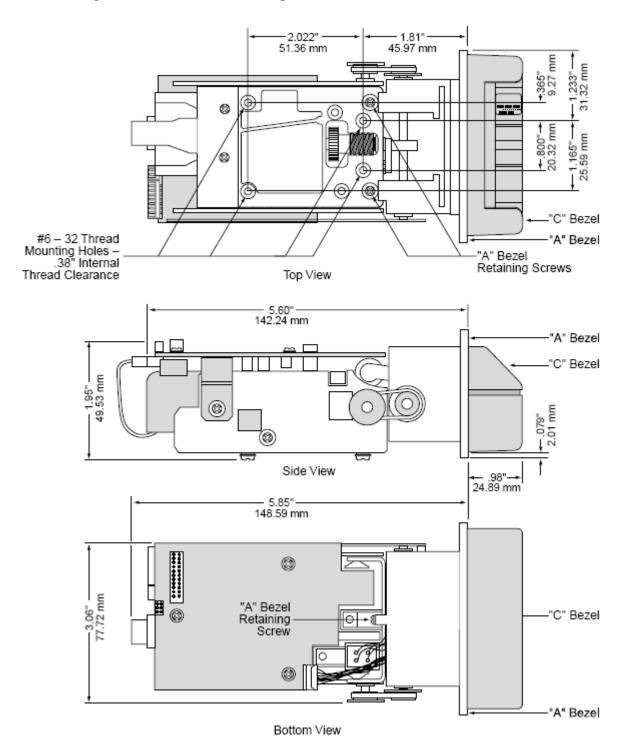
"C" Bezel Mounting – Top, Side, and Bottom Views
